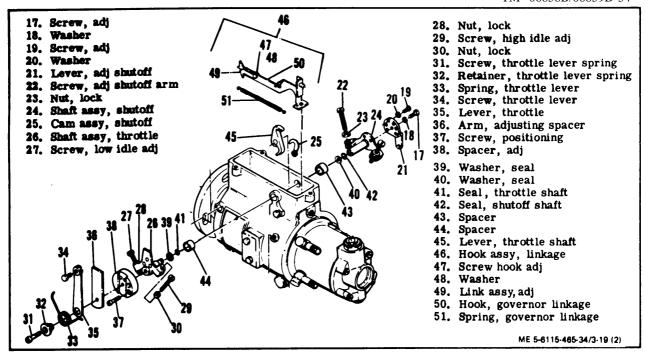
Fuel Injection Pump, Exploded View (Sheet 2 of 7)
